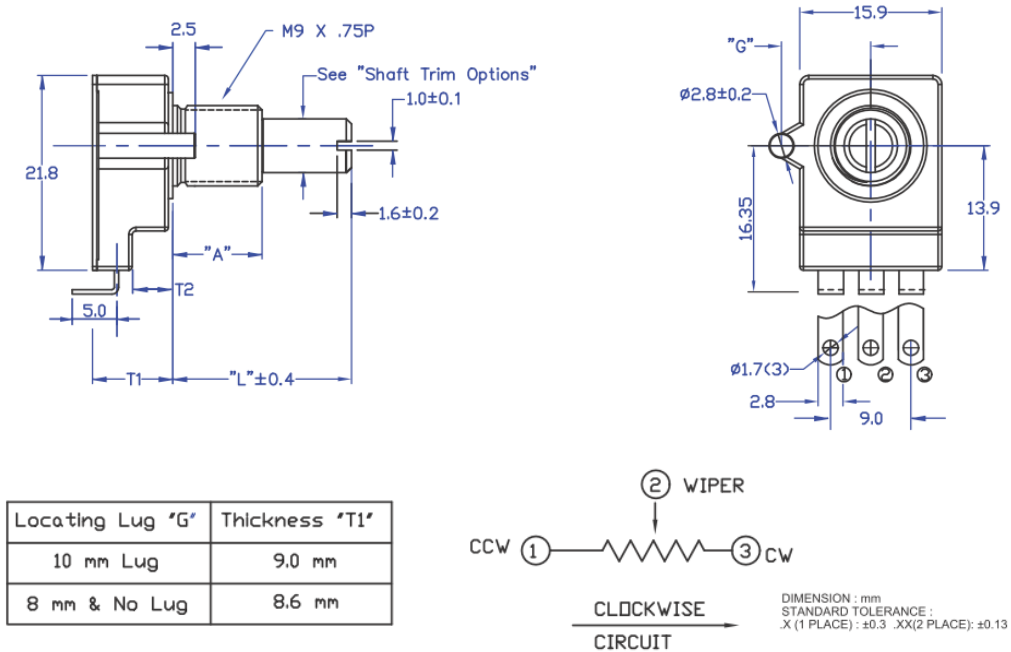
282U – Metal Shaft, Bushing Mount, PC Terminal Formed to Front
